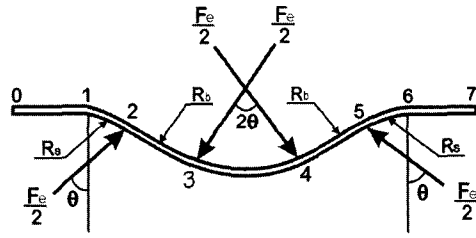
Detail description of the sheet formed by a single circular drawbead
